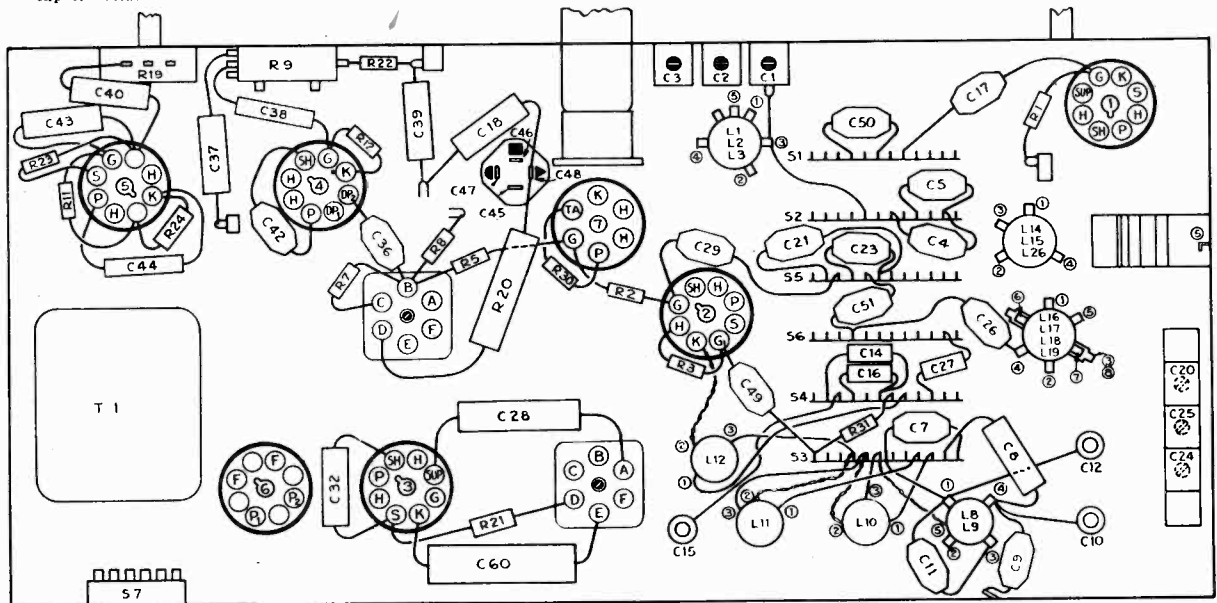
TUBE, TRIMMER AND PARTS LOCATION—BOTTOM VIEW
